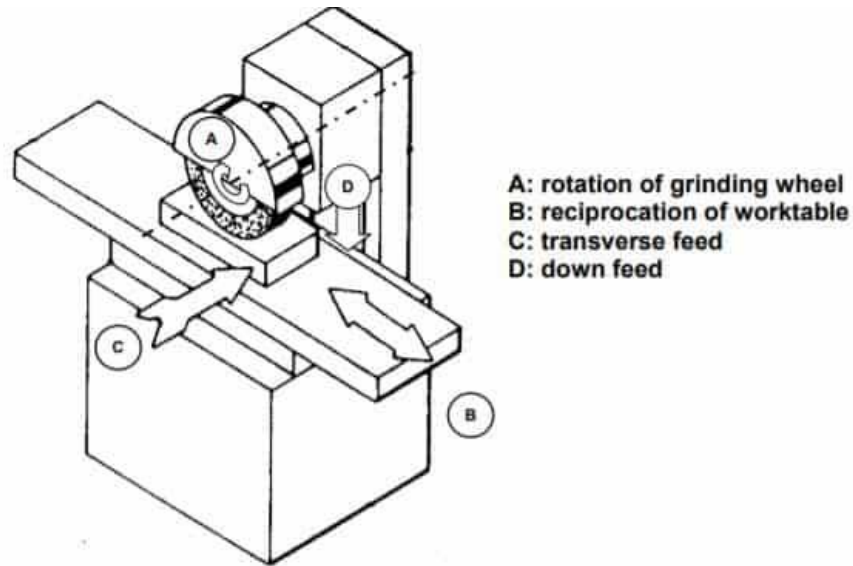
Horizontal spindle reciprocating table surface grinder
